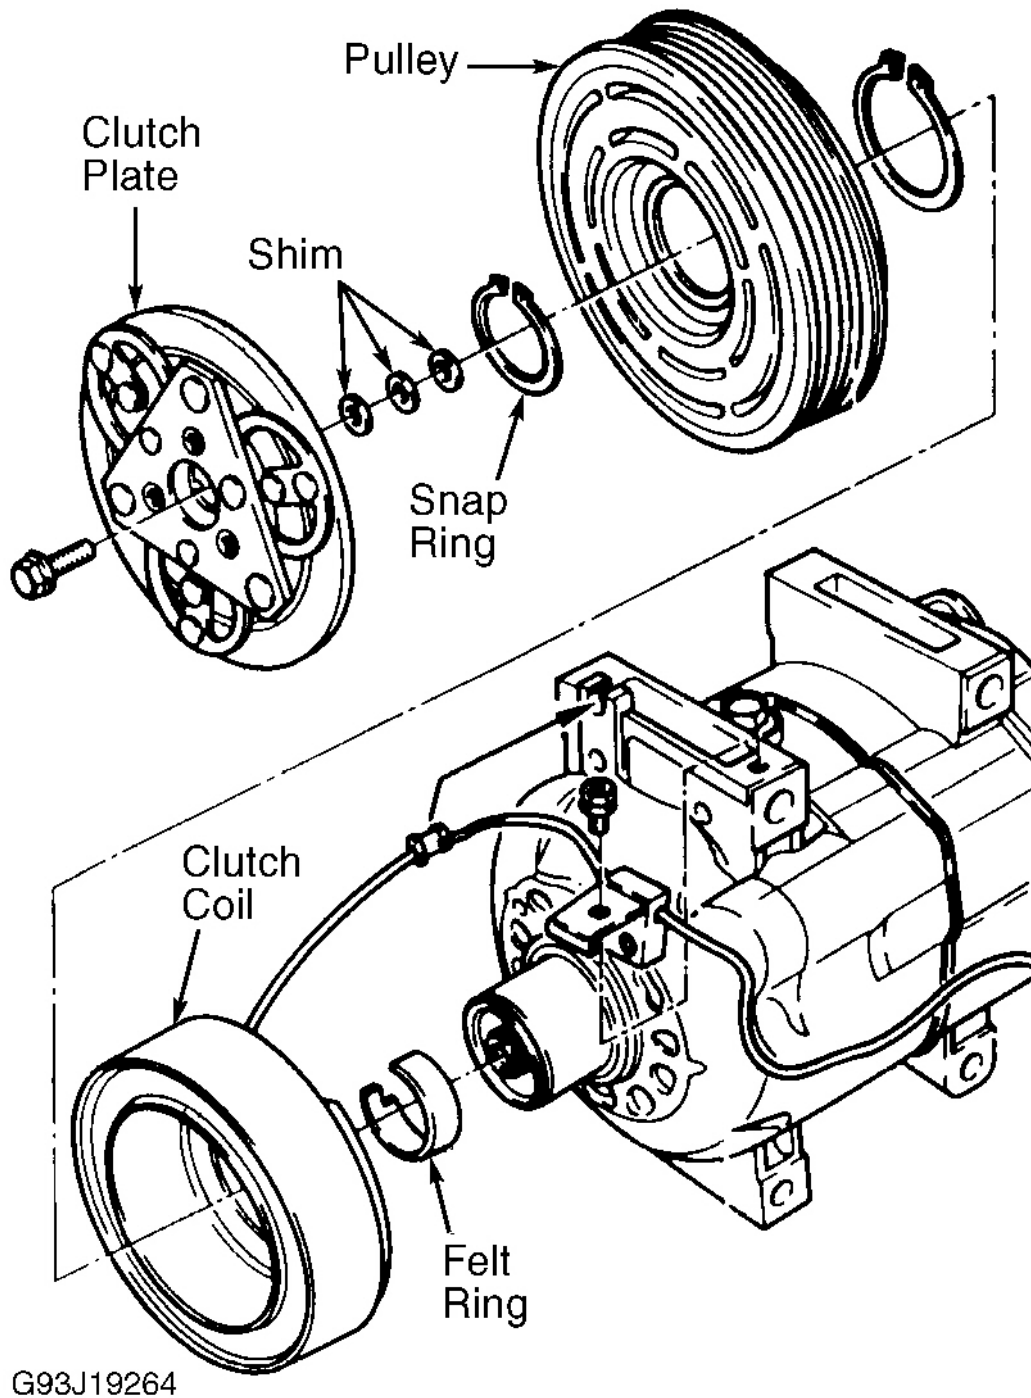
Exploded View Of Compressor (Zexel 6-Cylinder)
